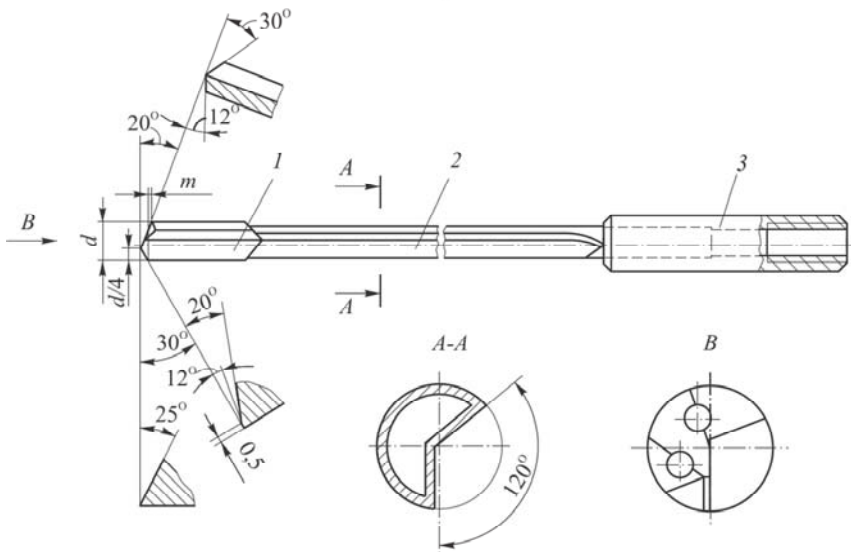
Gun drill ($d = 1-30 \text{ mm}$):
